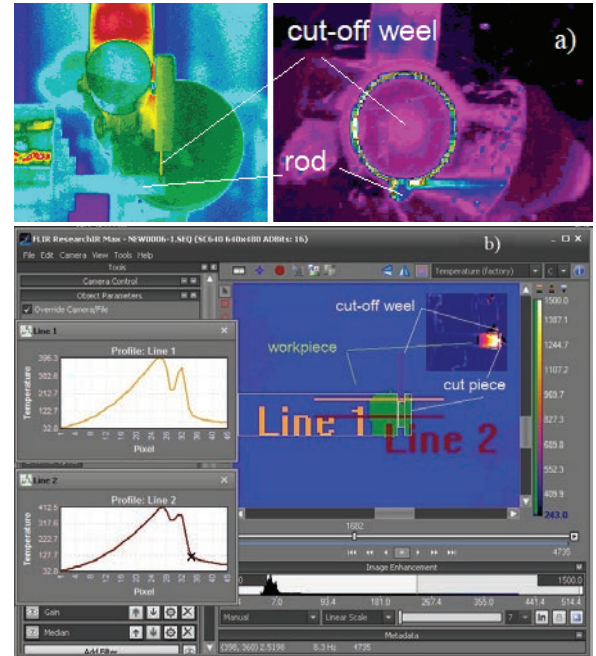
Illustration of thermography measurement process of cut-off wheel, workpiece and cut piece temperatures, respectively in elastic abrasive cutting of cylindrical rods
